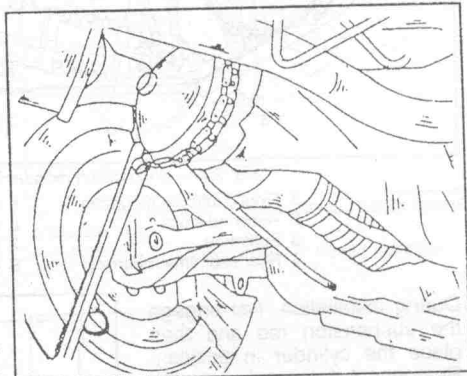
Removal of a rear suspension sphere with a chain wrench.
